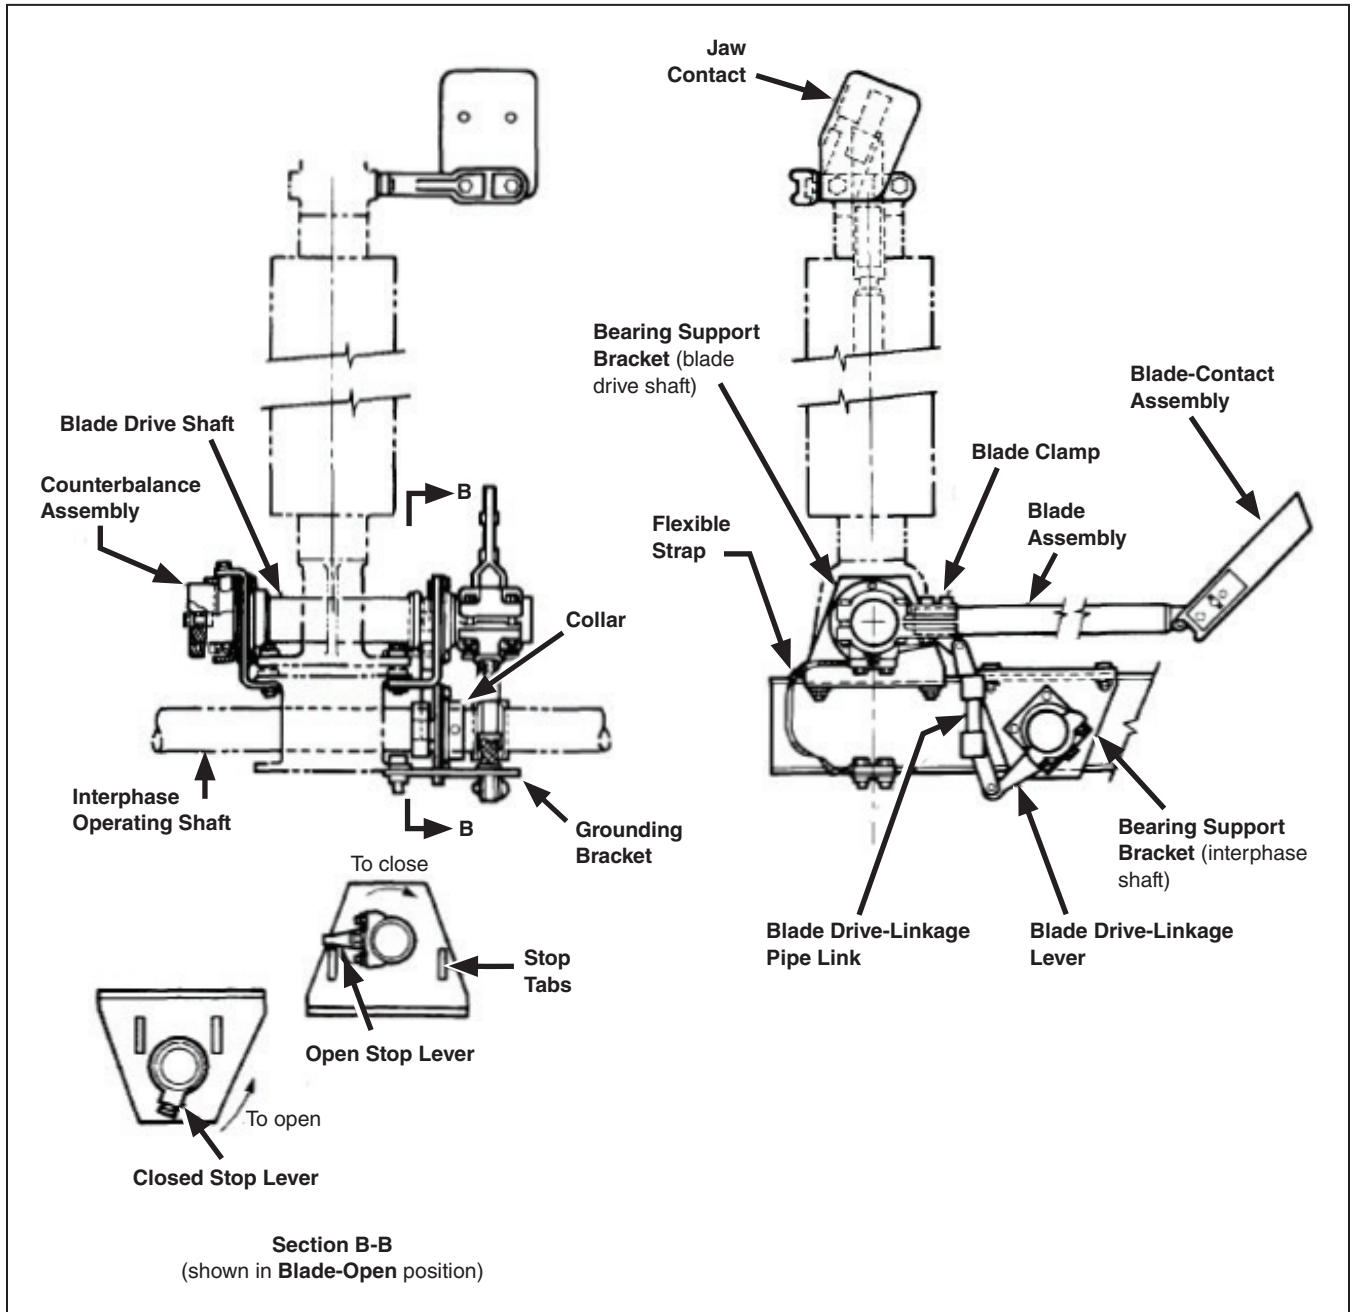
Typical grounding switch pole-unit blade assembly detail, shown for identification purposes. Arrangement may be opposite-hand to that shown. For the actual application, refer to the erection drawing furnished.
